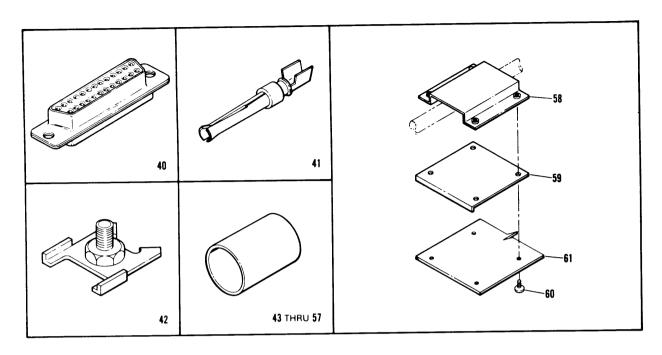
HARNESS AND CABLE COMPONENT ASM (SHEET 2 OF 2)
